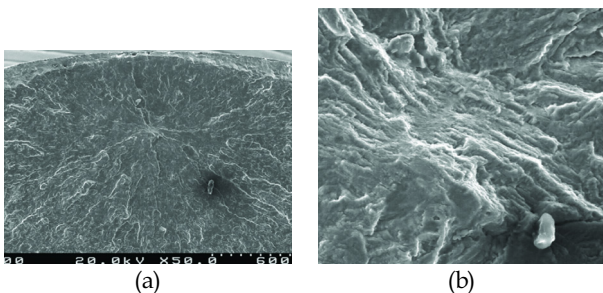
(a); Magnified view of L-crack, (b); initiation site of L-crack: facet type
